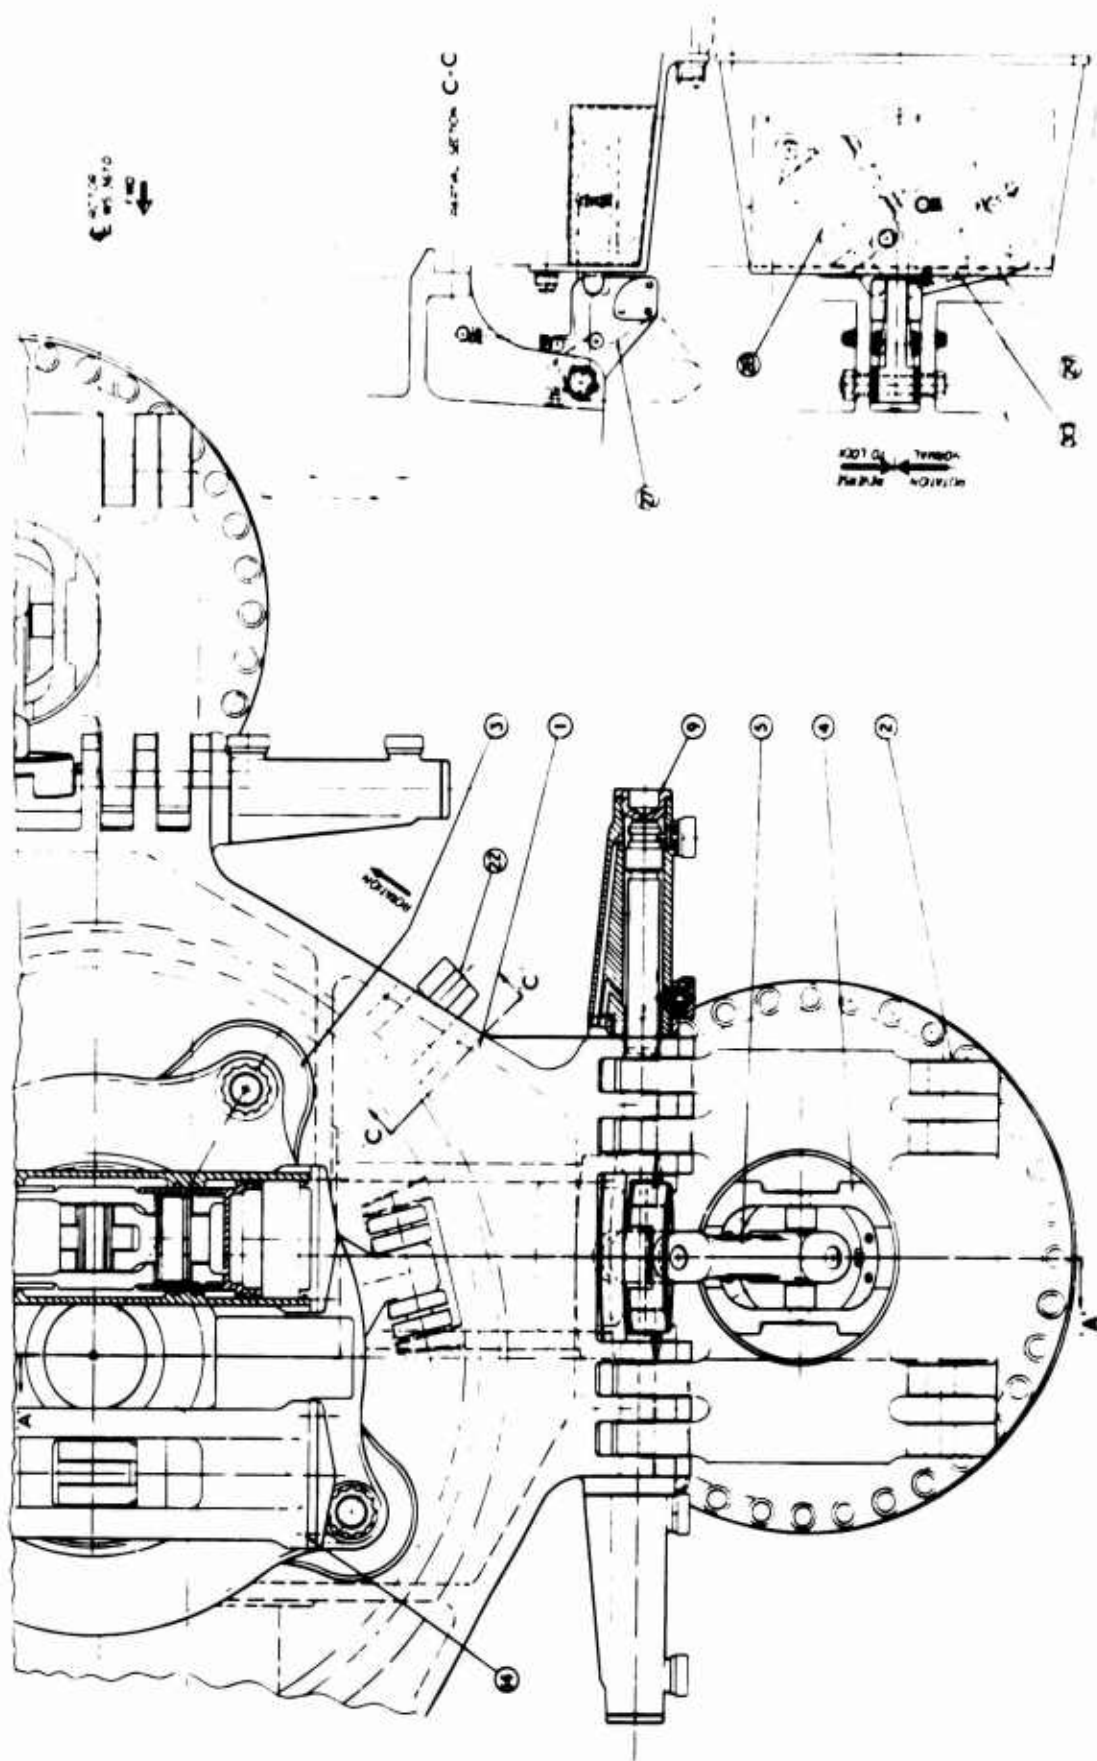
Rotor Hub and Blade Folding Assembly (Sheet 2 of 2).
